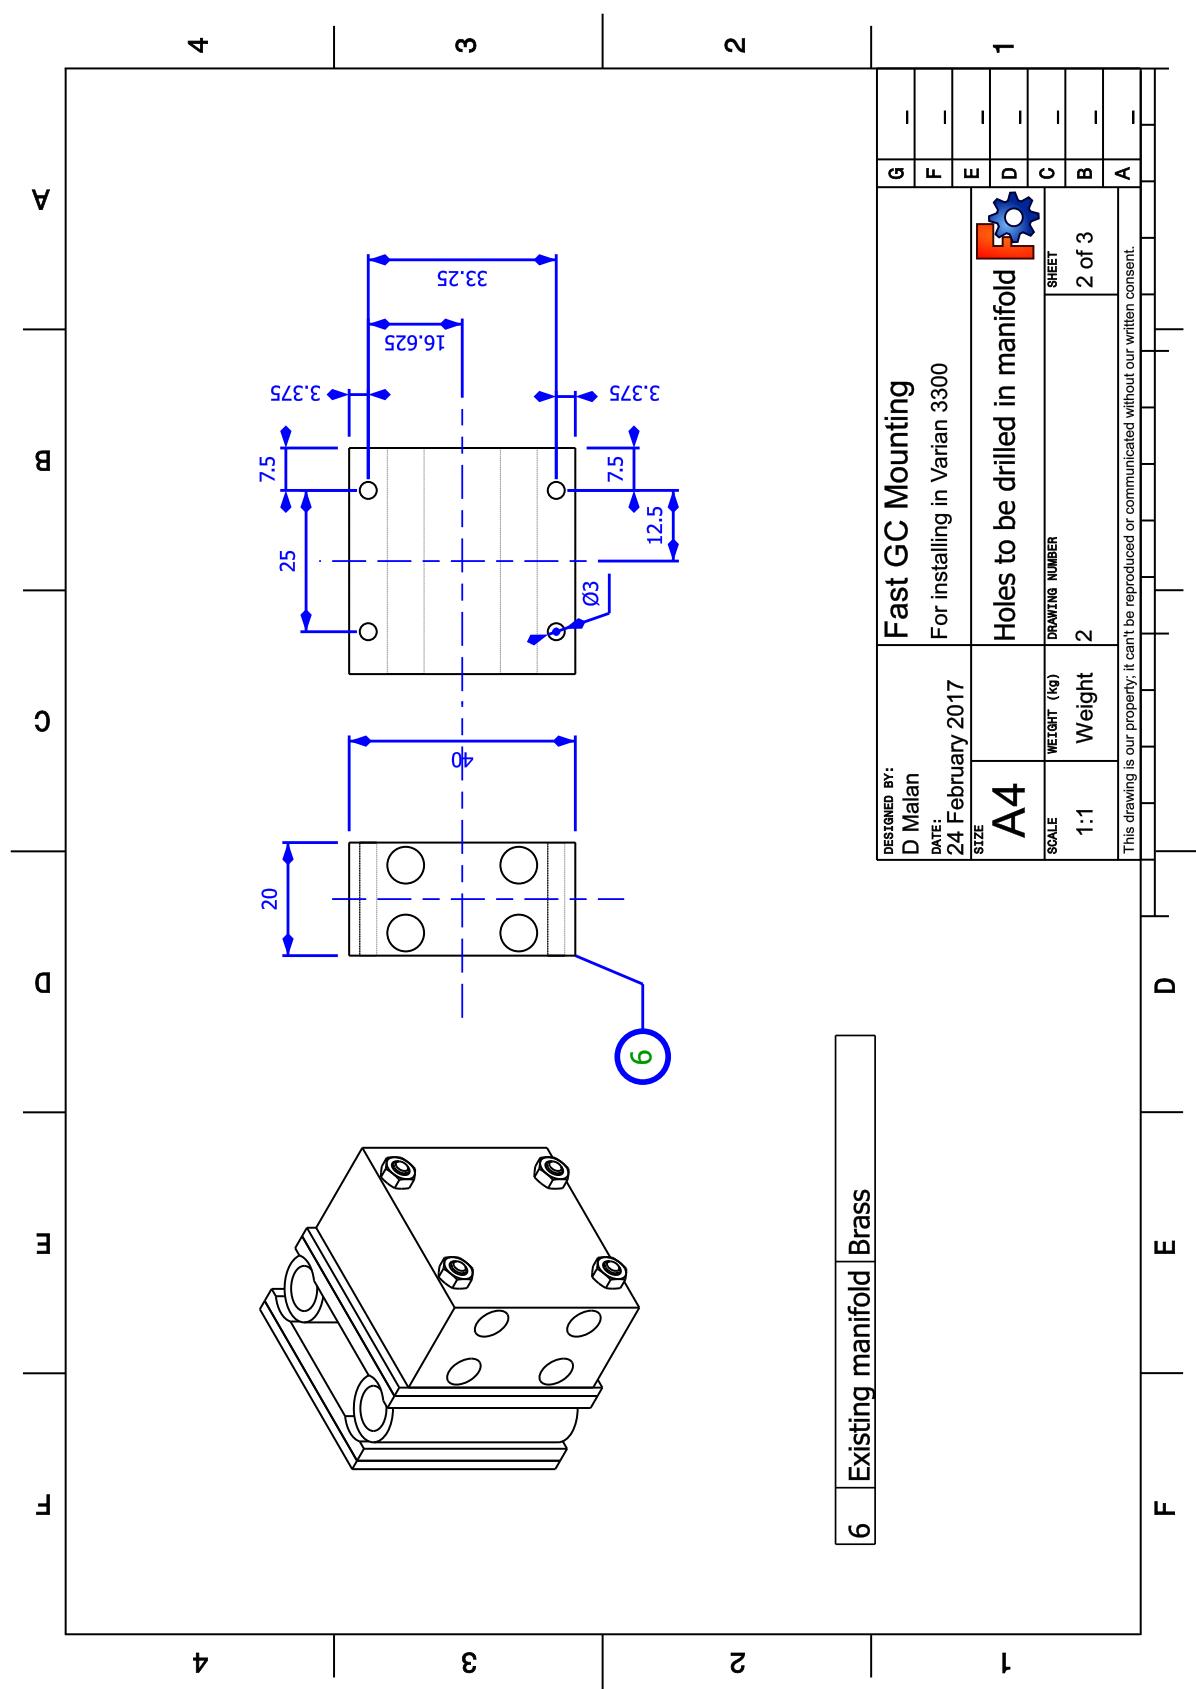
A technical drawing of the T-piece block mounting.
